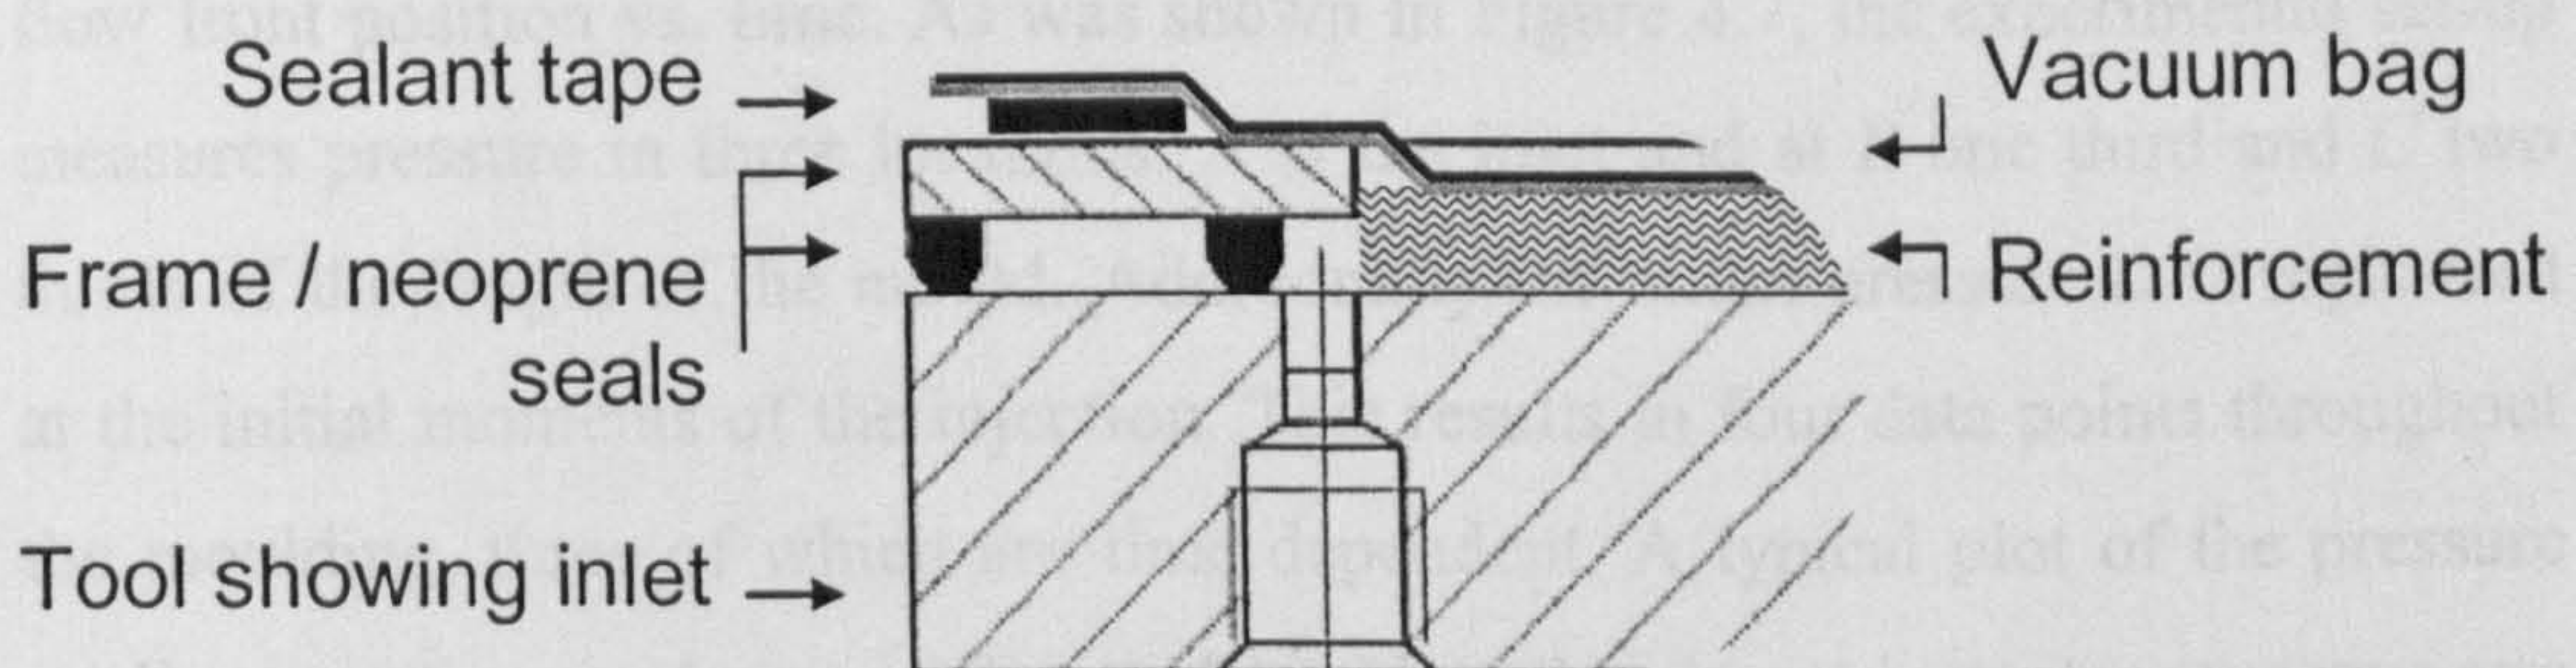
Detail Y: showing the set-up of the frame, inlet and seals
